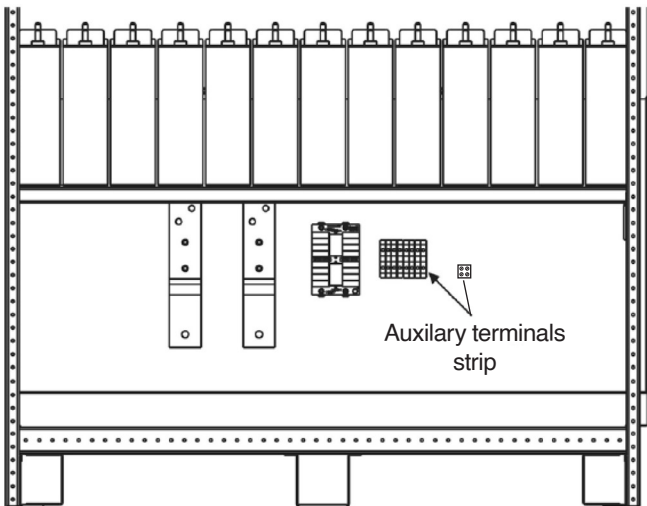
Auxiliary terminal strip layout from 400 to 800 kVA models.
